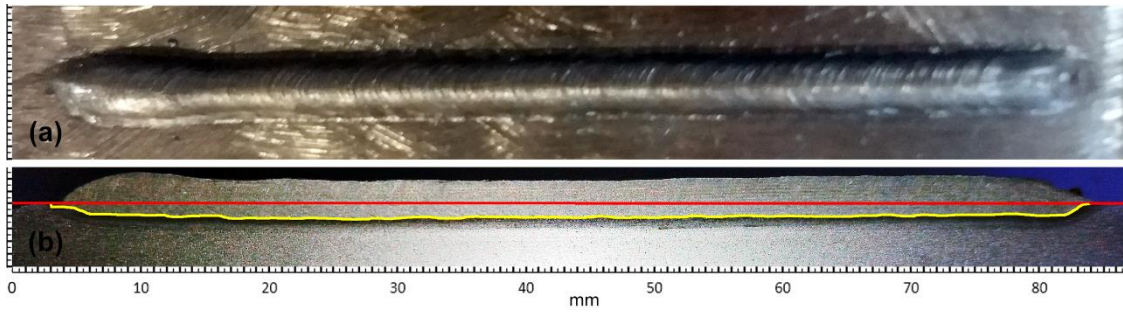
Weld bead obtained in the experiment 4: (a) Top view of the weld bead; (b) Weld bead depth profile (yellow line) and surface of the workpiece (red line) obtained by the macrographic analyses algorithm.
